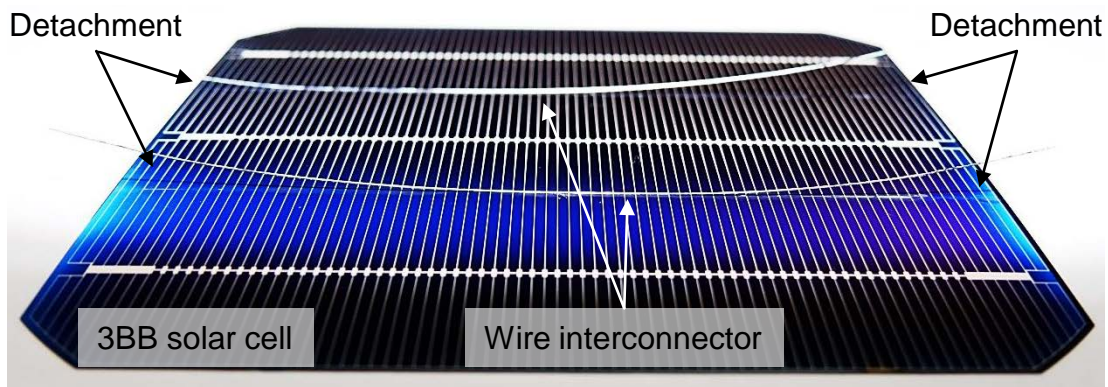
Immediate detachment of straight wire interconnectors after soldering directly on the finger grid between the busbars of a silicon solar cell (size: 156 mm \times 156 mm).
